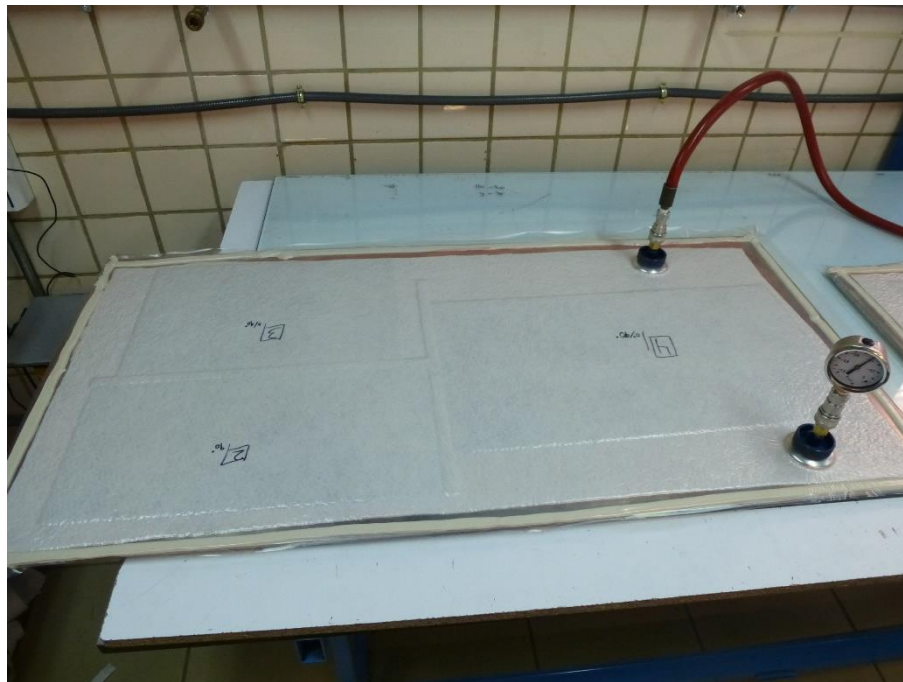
Final state of the vacuum bag, checking for possible leaks using a vacuum gauge.
